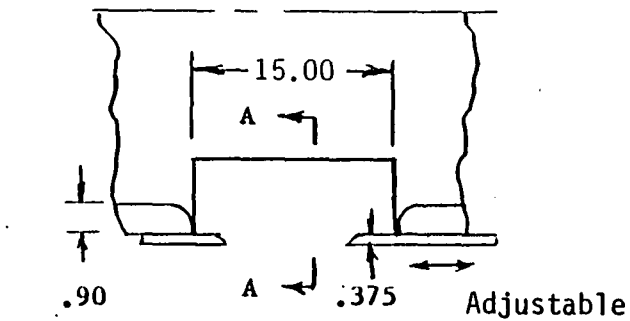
TANDEM FAN WIND TUNNEL MODEL
